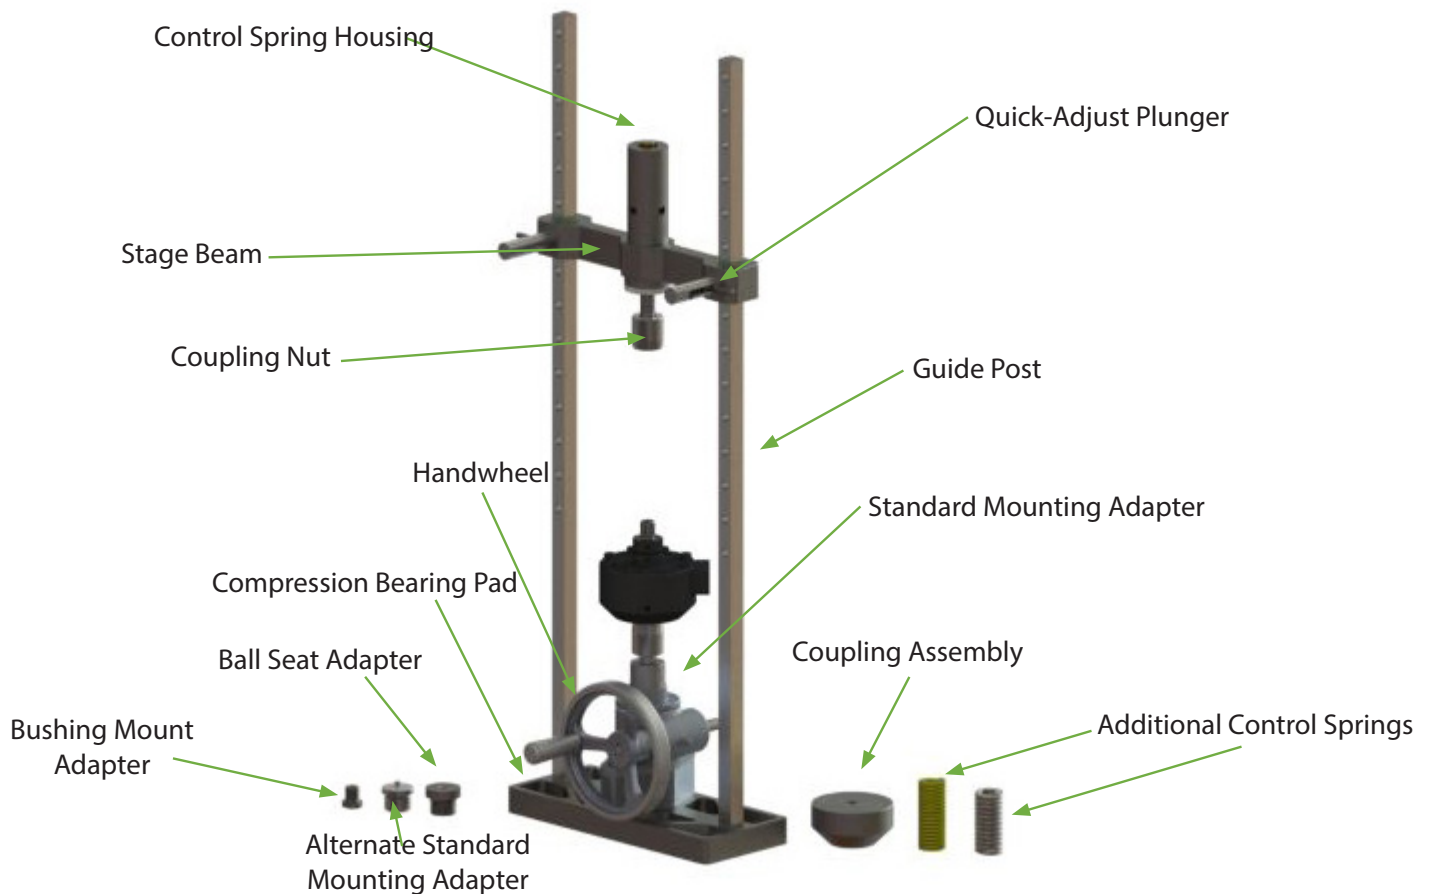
Standard Components of Morehouse Portable Calibrating Machine
